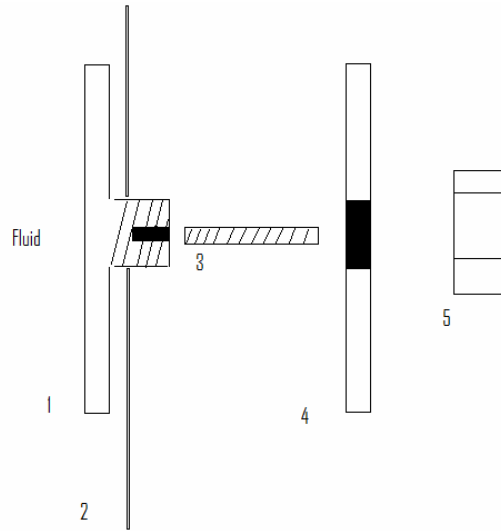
Exploded diagram of piston assembly. Not drawn to scale. Including: Part 1: Front Piston Face, Part 2: Latex Membrane, Part 3: 10-32 Threaded Rod, Part 4: Back Piston, Part 5: Securing nut
